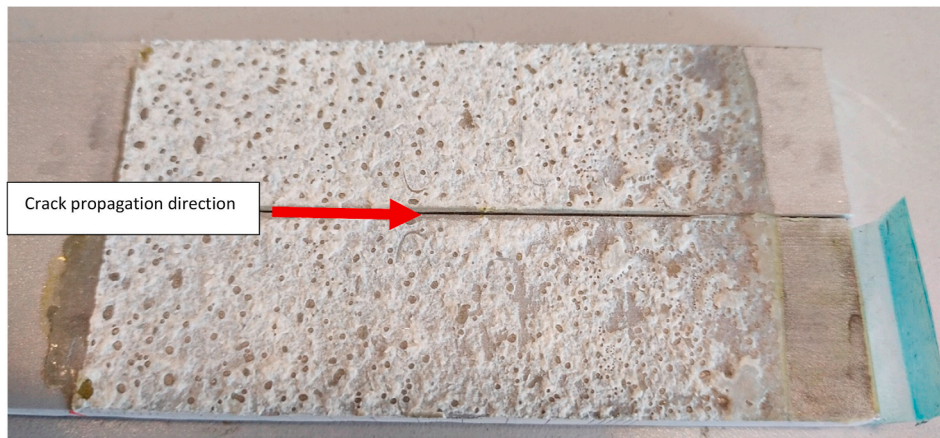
The cohesive fracture surface of specimen TDCB_01.
